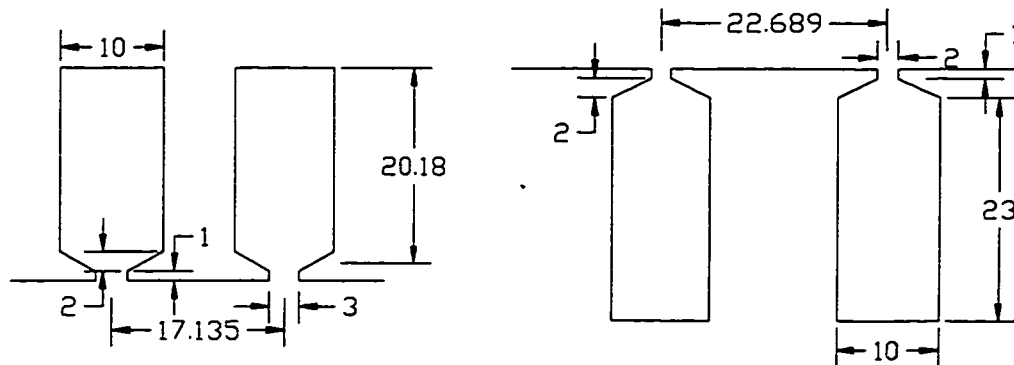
Dimensions of the stator and rotor slots in mm.
